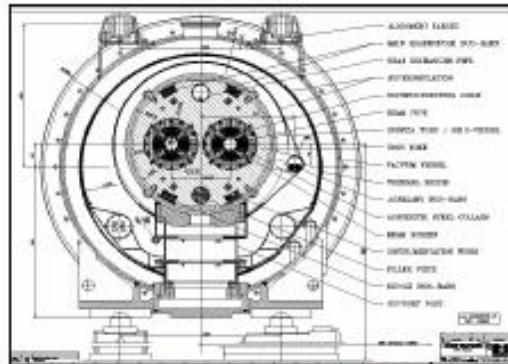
Cross-section of short straight section with quadrupole coil mass inside cryostat
